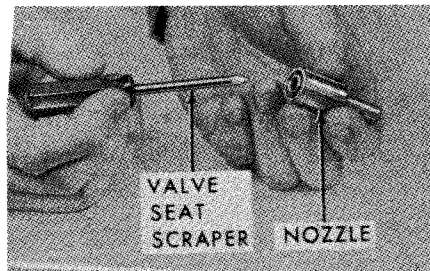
Use scraper to clean carbon from valve seat in nozzle body.
